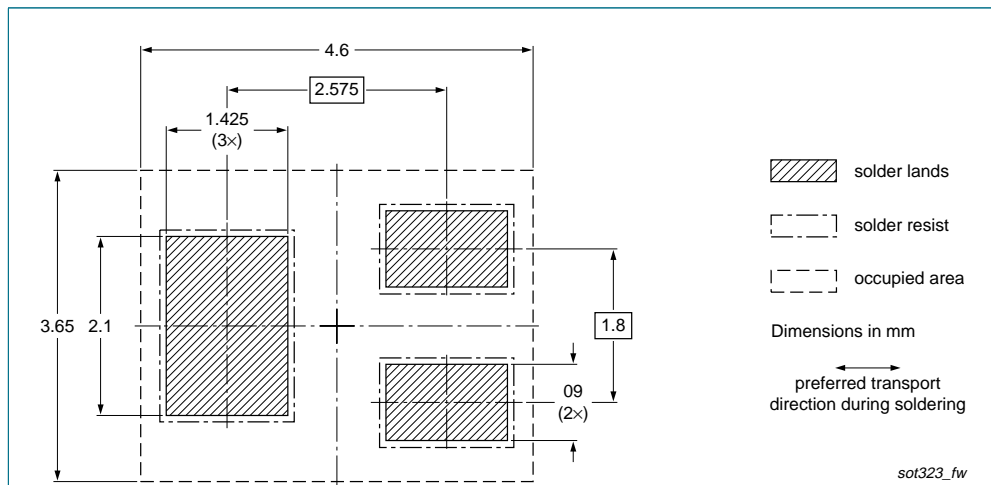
Reflow soldering footprint BAS16VY (SOT363/SC-88)
